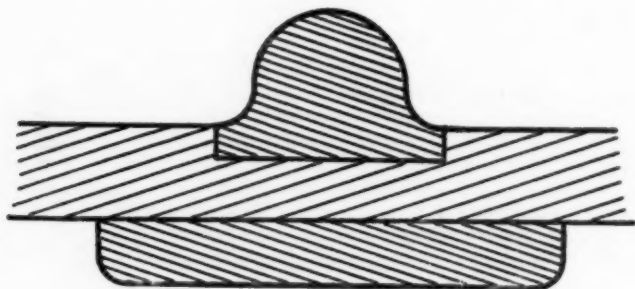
PATTERN INSERTED IN "PLATE" TO PROVIDE GOOD FILLETS
